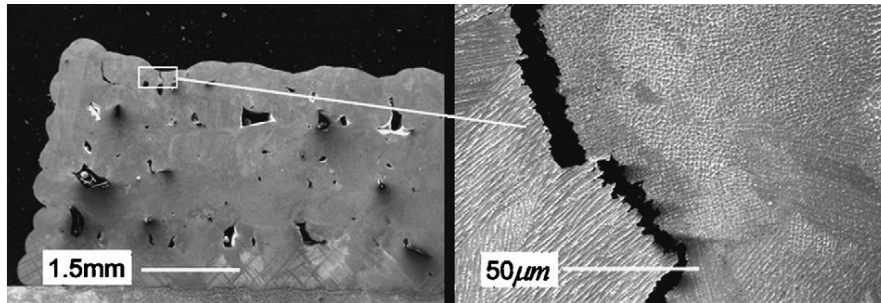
Cross-sectional view of SLM processed Waspalloy showing the formation of cracks [72].
